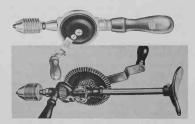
Above. Hand drill. Below. Breast drill. (Stanley Tools)
